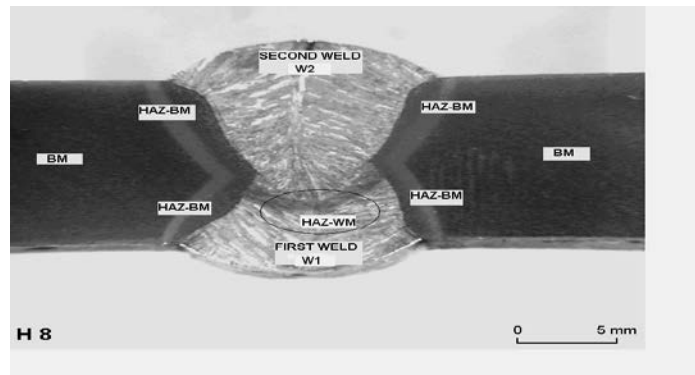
Macrostructure of two pass (double sided) line pipe welds
